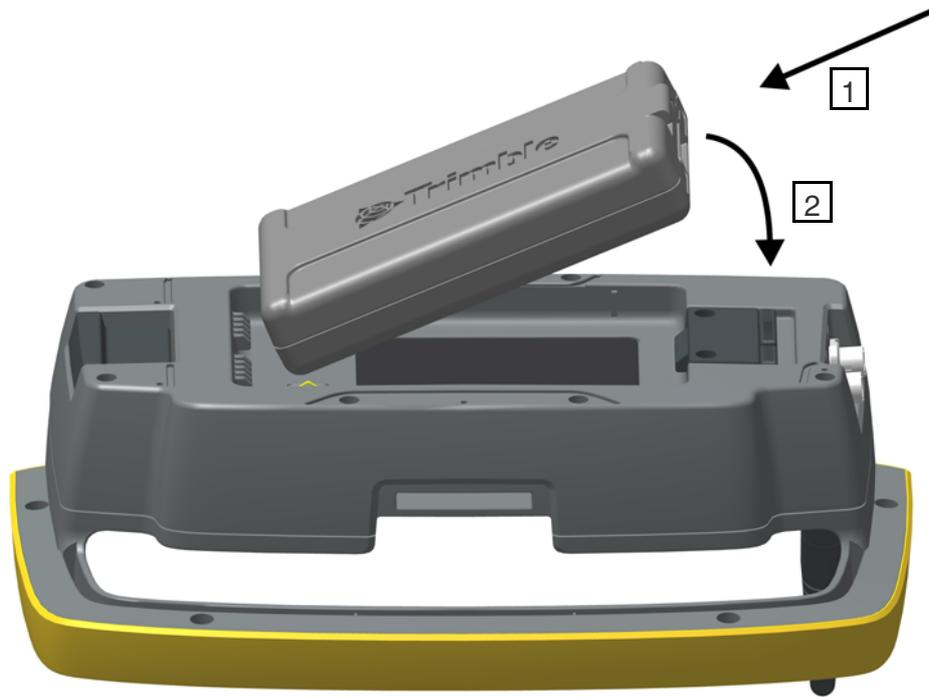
Attaching a battery to the Trimble Robotic Holder
